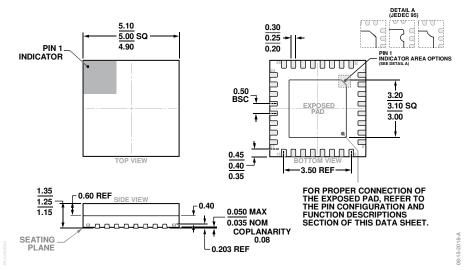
32-Lead Lead Frame Chip Scale Package [LFCSP\_CAV] 5 mm × 5 mm Body and 1.25 mm Package Height (CG-32-2)
